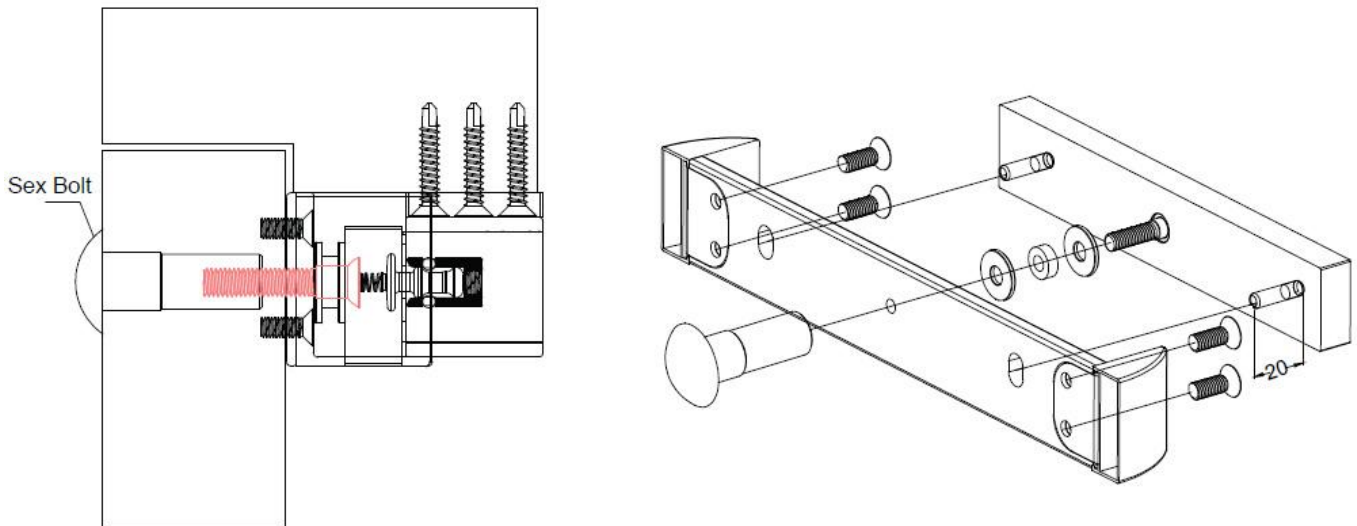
Illustration of MEM2400-LP with Security Plate installation for out-swing and in-swing wooden door
